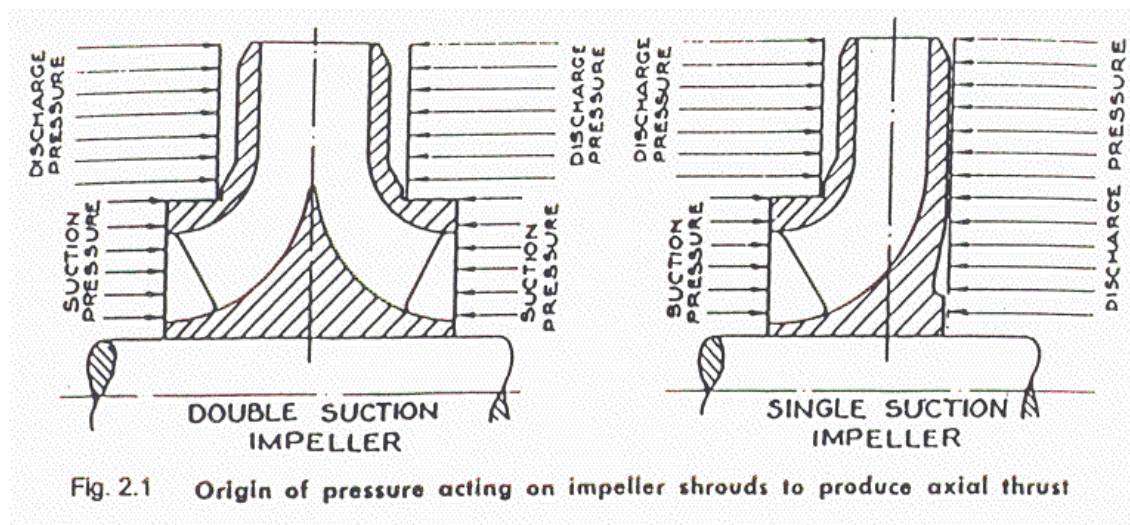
Origin of pressure acting on impeller shrouds to produce axial thrust
